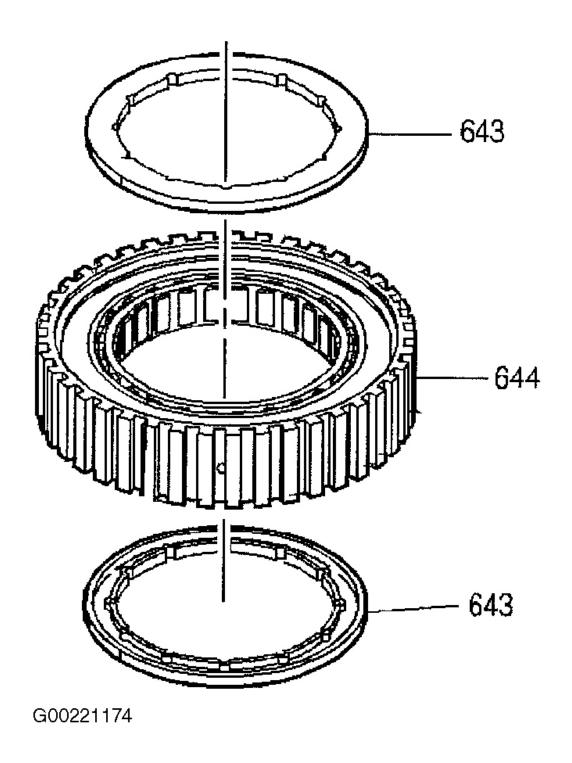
Disassembly Of Forward Clutch Sprag (1) Courtesy of GENERAL MOTORS CORP.
